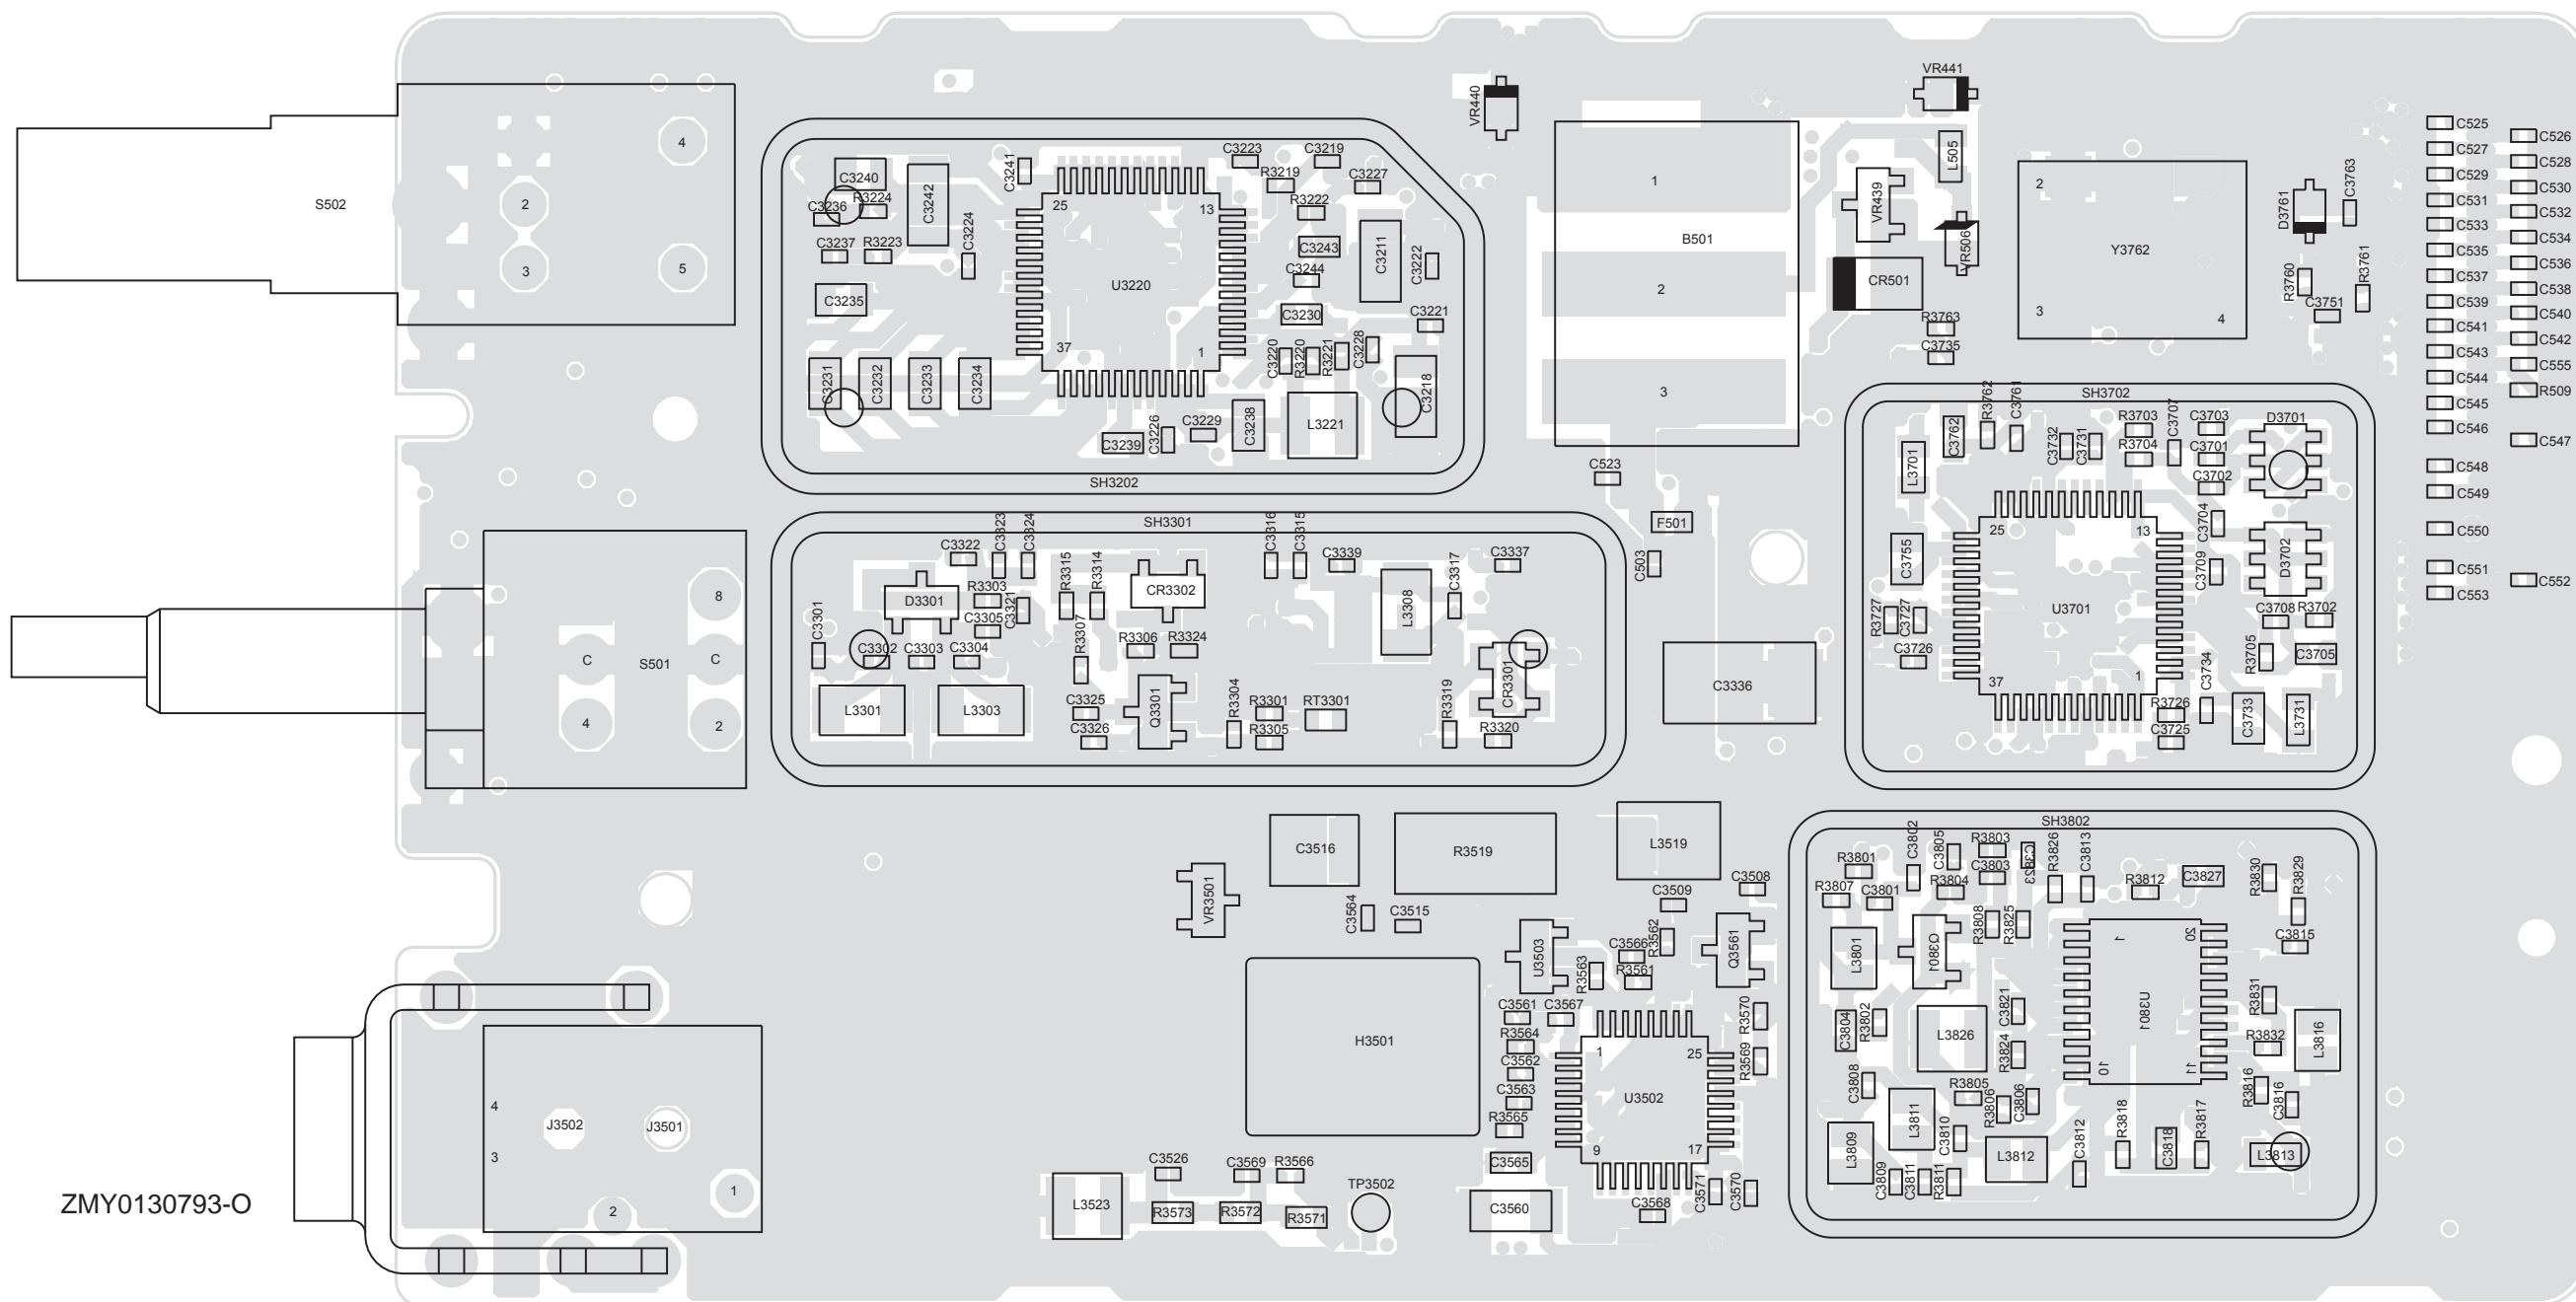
VHF (136-174MHz) Main Board Bottom Side PCB No. 8486062B12
